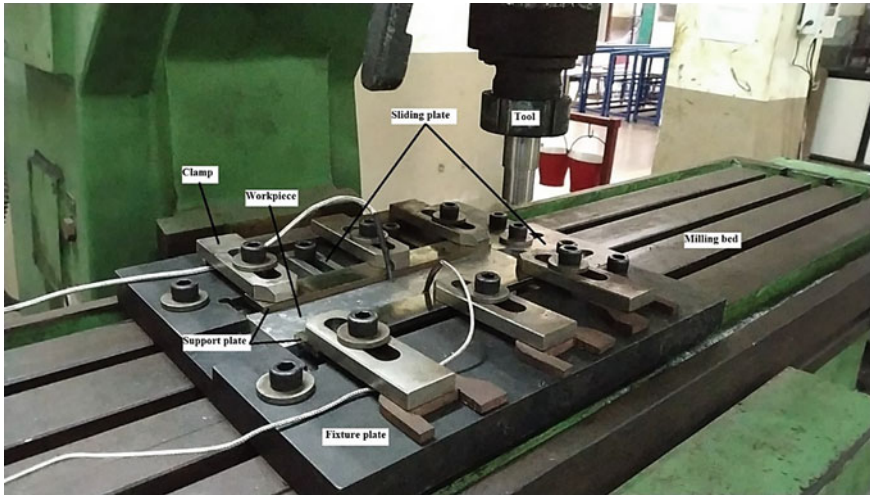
Final fabricated fixture installed on the vertical milling machine bed
